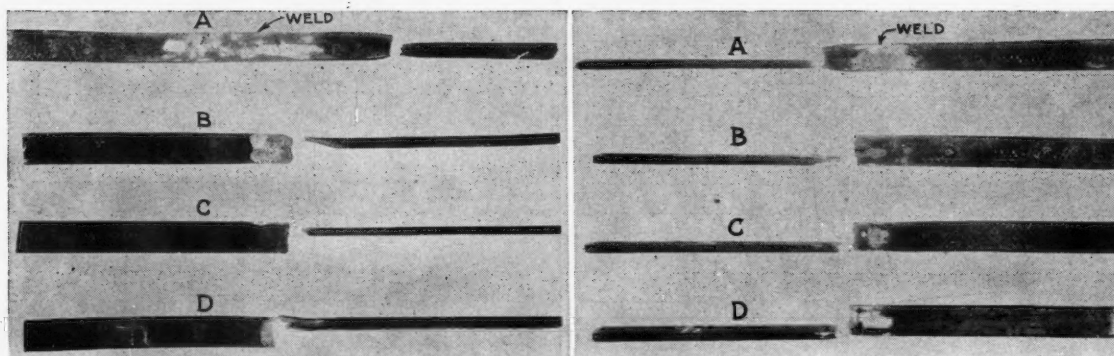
(Left) Types of failure in forage welds. Fig. 4. (Right) Types of failure in oxyacetylene welds
